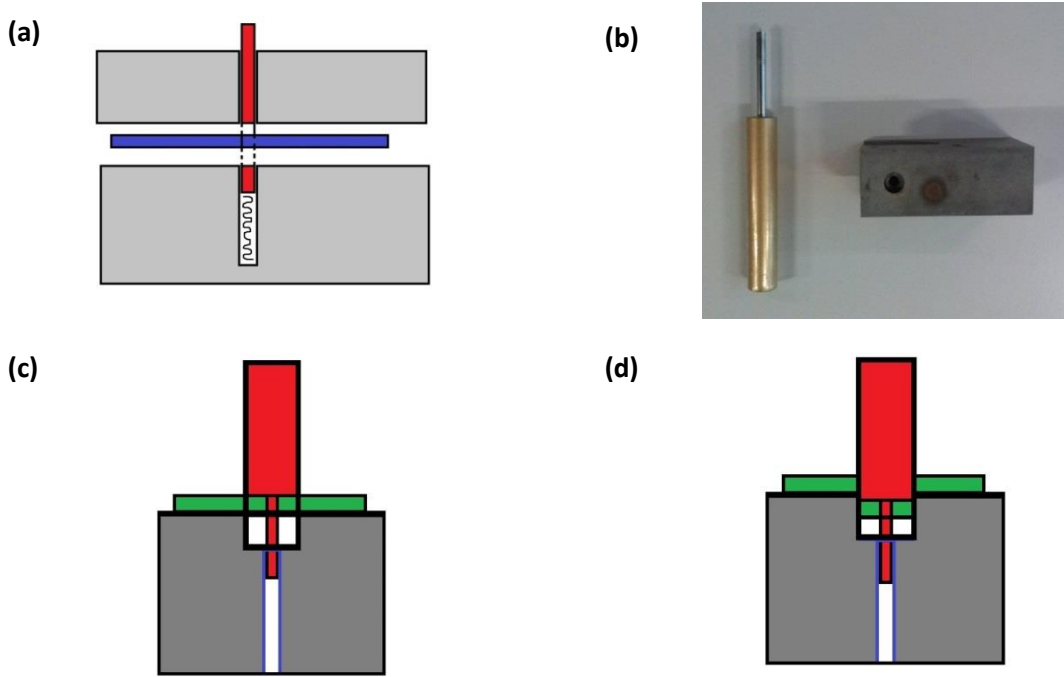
Devices employed for 1mm Fe sample fabrication (a), High-resolution Eckert 1mm puncher; (b), The alignment pin and corresponding cutting mold; (c), Alignment of 1mm hole of 316L sheet; (d), Punch 3 mm ring out of 316L sheet.
